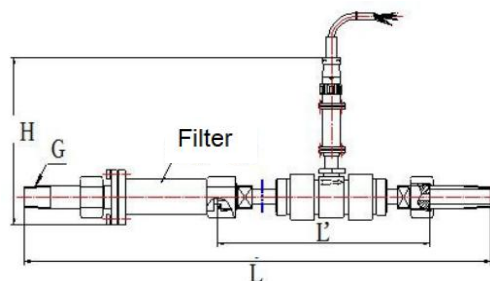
DN4~DN10 threaded connection flowmeter structure and installation dimensions
